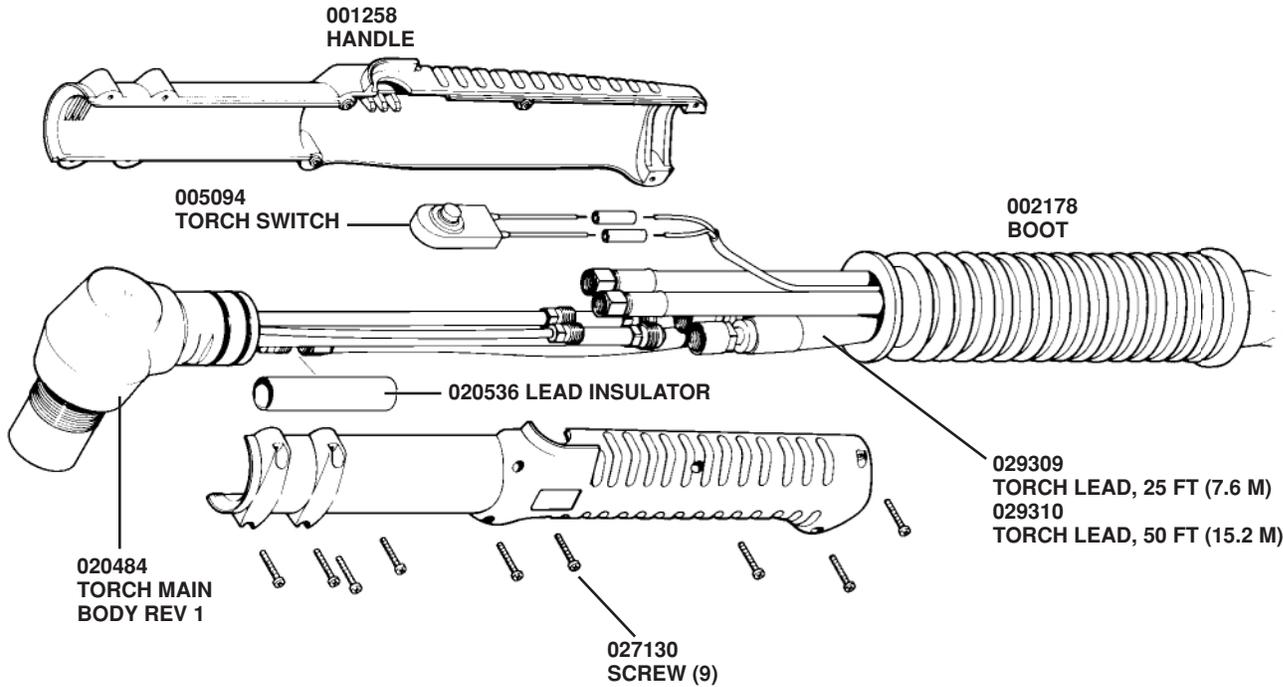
MAX200 Rev 1 90° Hand Torch Assembly
